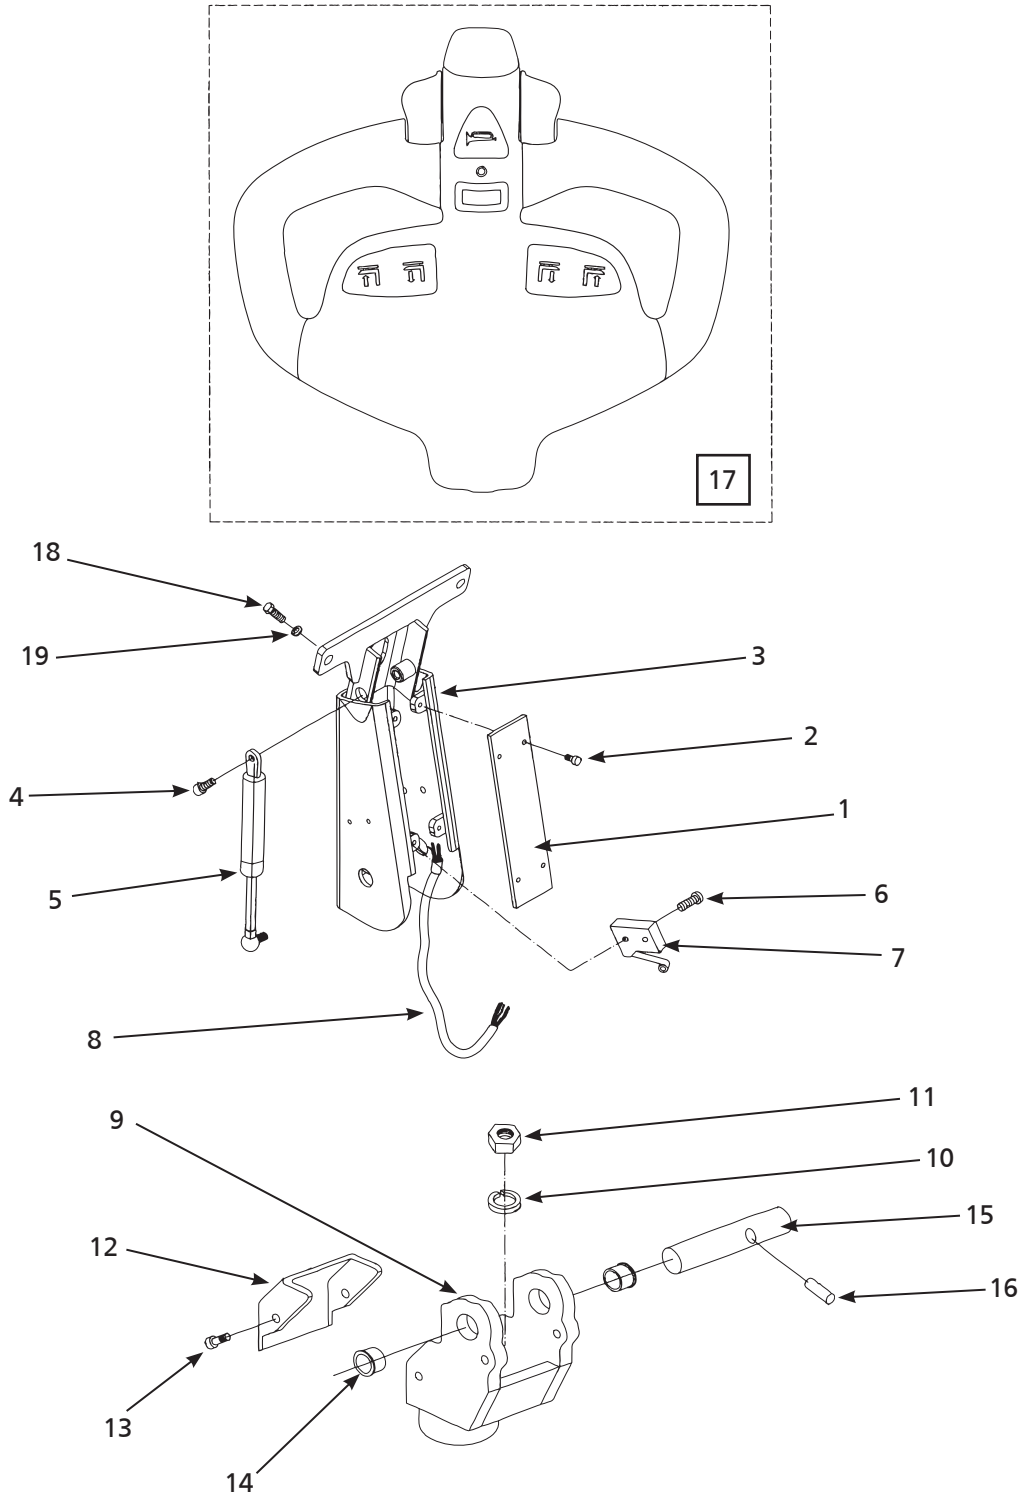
Repair Parts Illustration for Pallet Truck Handle Assembly (Model 2LEB8A)
